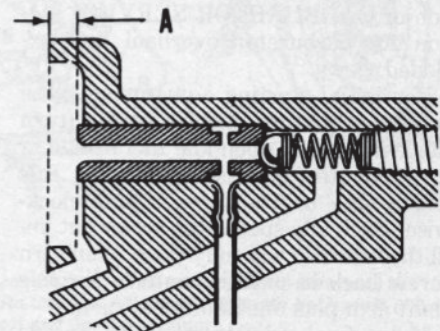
Plunger guide should be 0.125-0.155 inch (A) from end of guide to face of oil tank.
